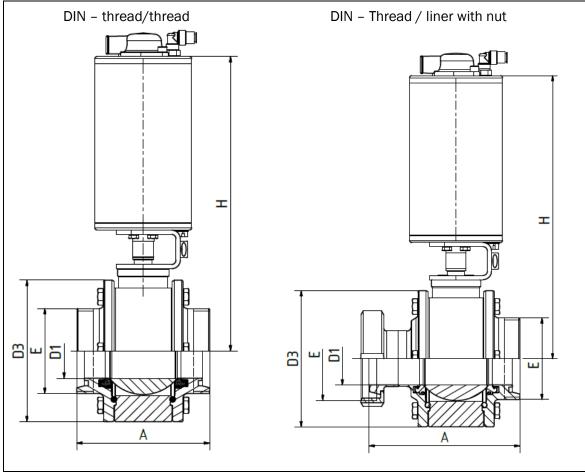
Ball valve with pneum. actuator: Connection variants: thread/thread, thread/liner with nut
